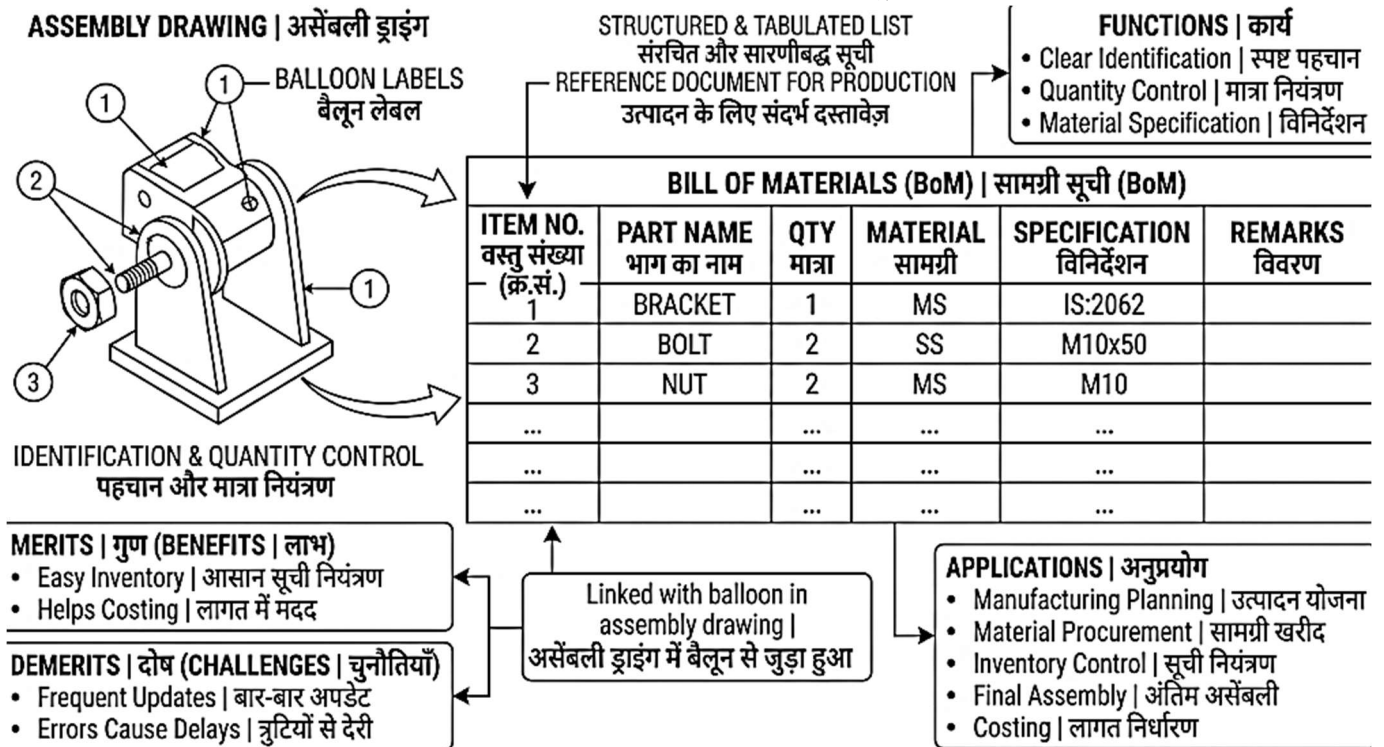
Bill of Materials in Assembly Drawing | असेंबली ड्राइंग में सामग्री सूची
